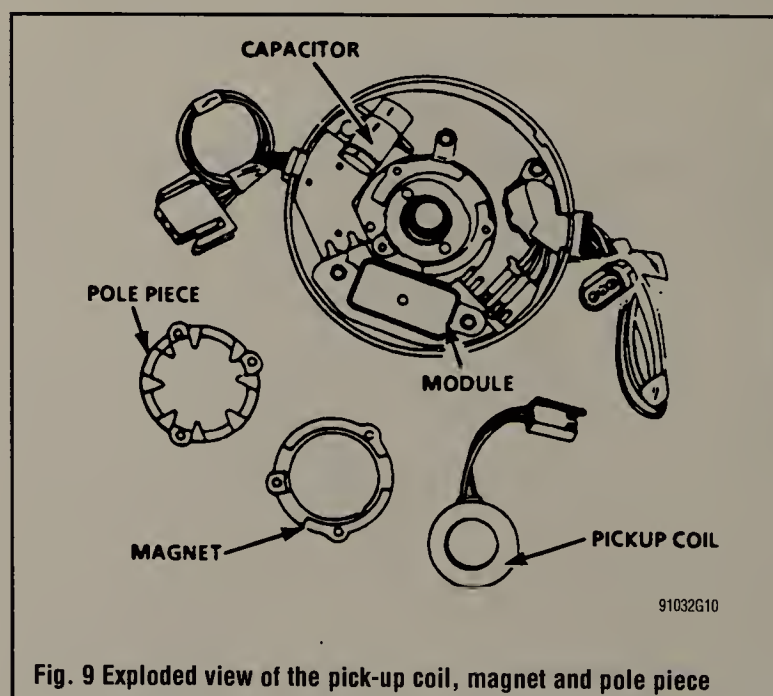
Exploded view of the pick-up coil, magnet and pole piece
